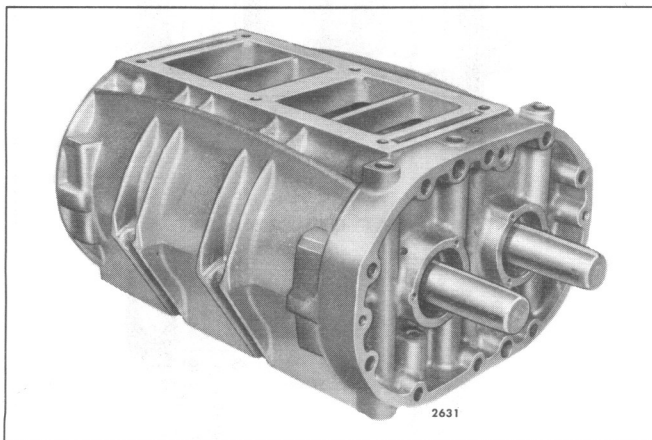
Assembling Blower Rotors in Housing and Front End Plate with Oil Seal Pilots (J 6270-5)
